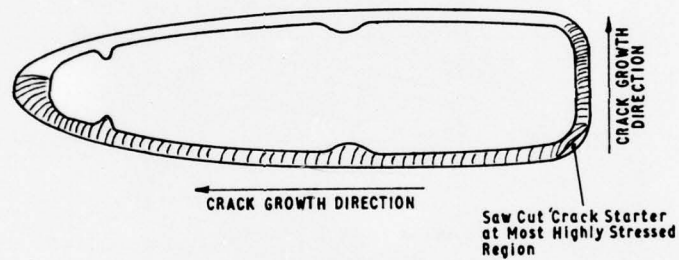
Typical helicopter rotor blade cross section after fatigue test
